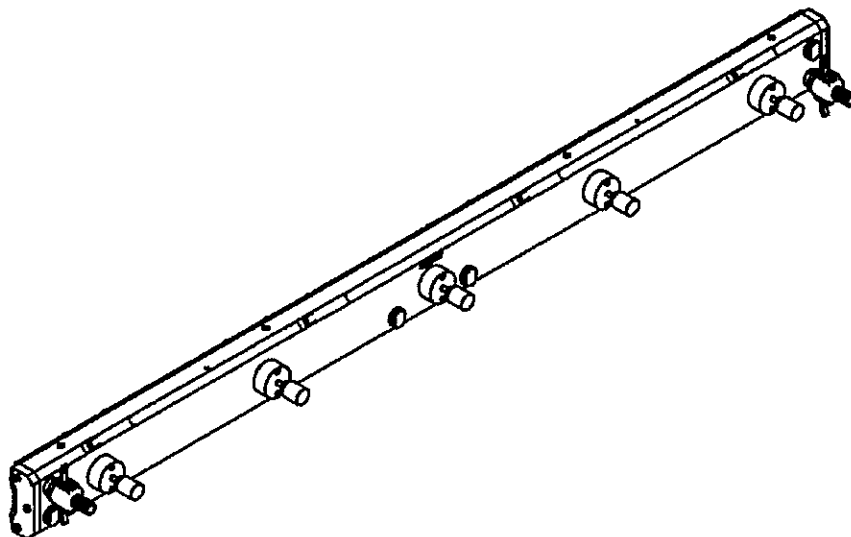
ENCLOSED DOCTOR BLADE ASSEMBLY
